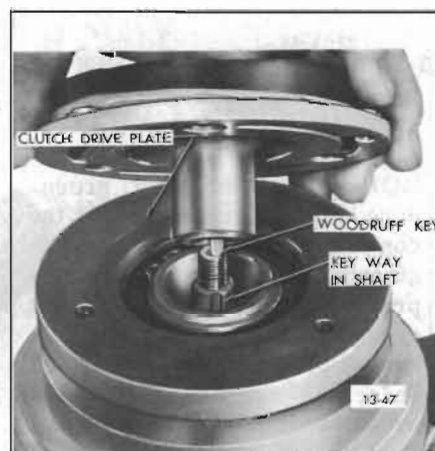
Positioning Clutch Drive Plate on Shaft
